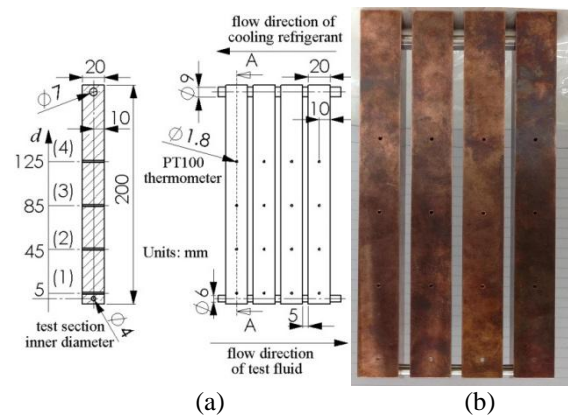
Details of the heat transfer test section (a) schematic view, (b) photograph
